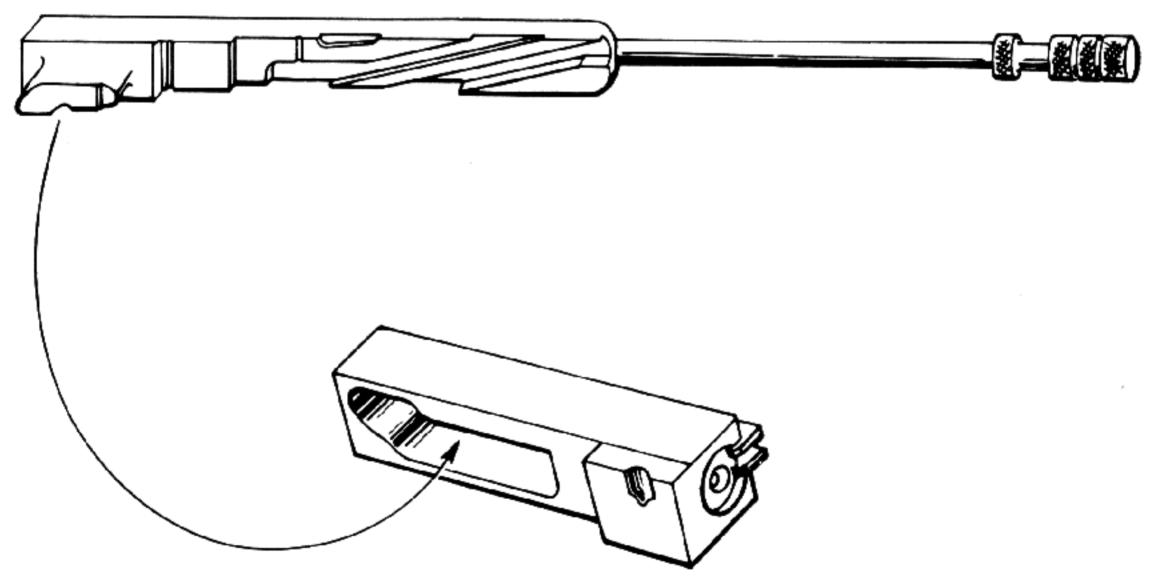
The Goryunov Machine Gun, showing operating slide (top) and bolt (bottom). The stud on the slide operates in the bolt slot to cam the bolt behind the locking shoulder.
